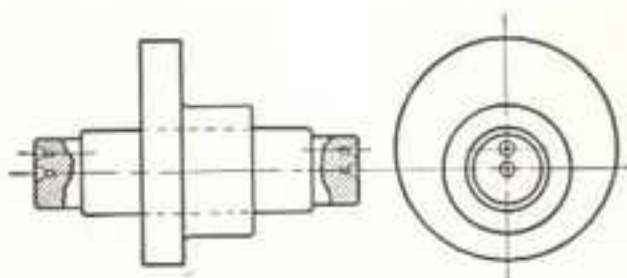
A Mandrel with Two Sets of Center Holes for Machining an Eccentric
